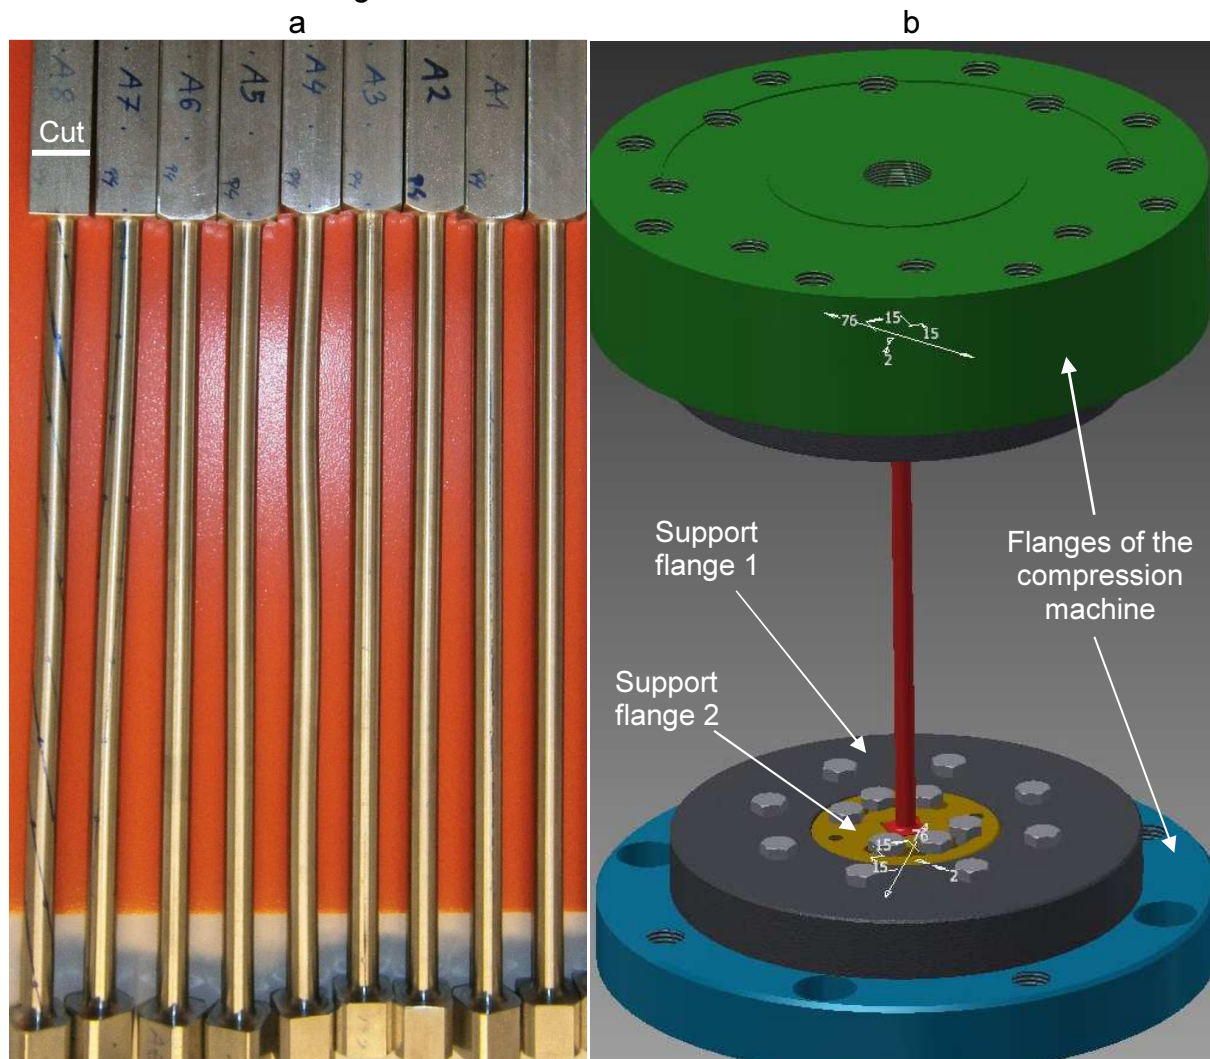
a) Samples before the buckling test, b) 3D layout of assembly with the supporting flanges and the sample
